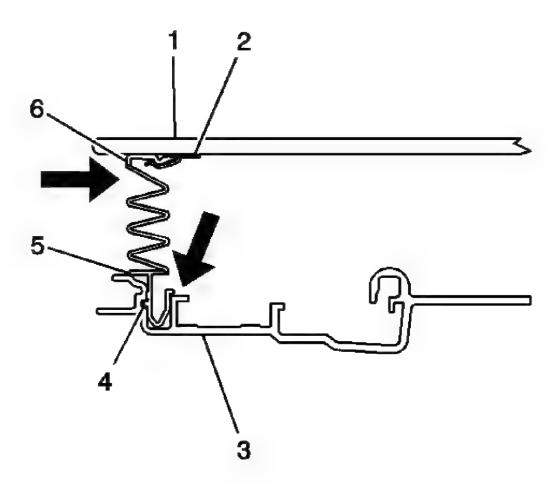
Installing & Installing Sunroof Panel Side Opening Cover Courtesy of GENERAL MOTORS CORP.
